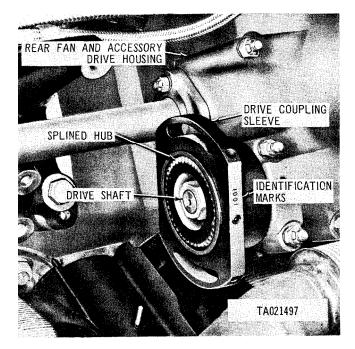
Correct position of fuel injection pump drive coupling on hub before pump installation.
